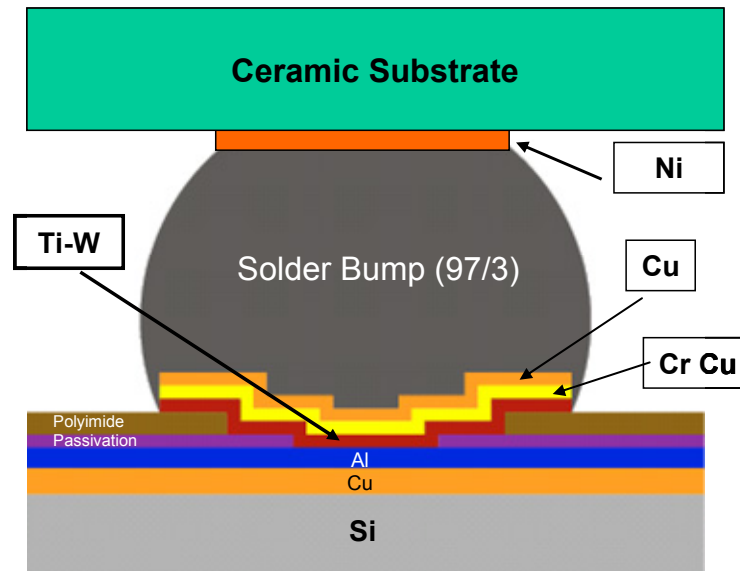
Illustration of the solder bump structure from Manufacturer I
